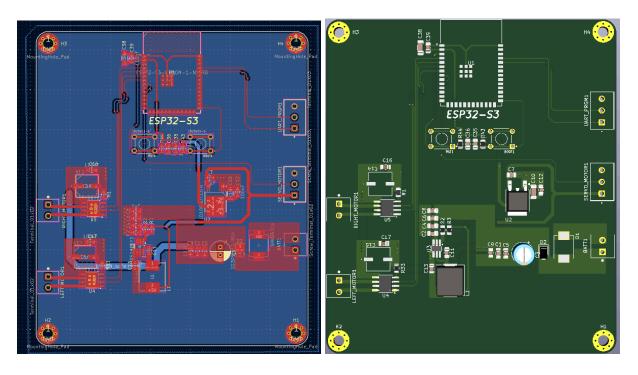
& 2.5: BattleBot PCB & its 3D rendering
